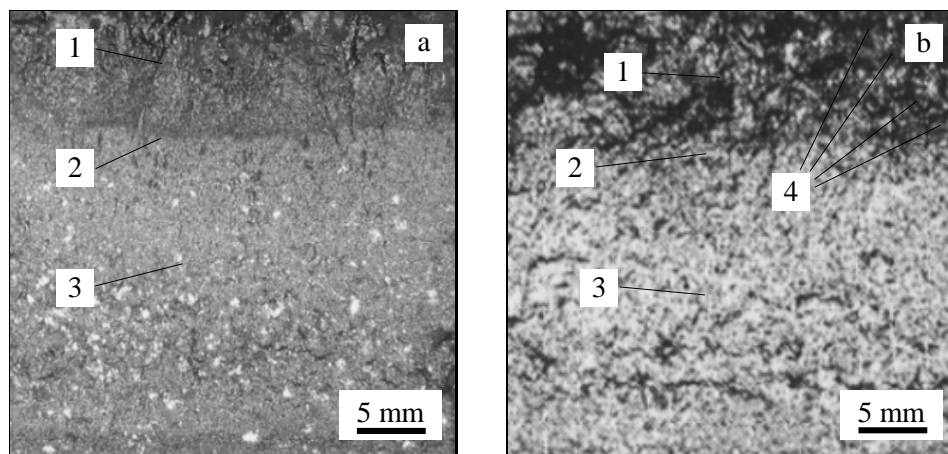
Fractures surface of specimens: a – specimen 1, b – specimen 2 (1 – porous layer, 2 – transitional layer, 3 – basic metal, 4 – traces of programmed loading).
